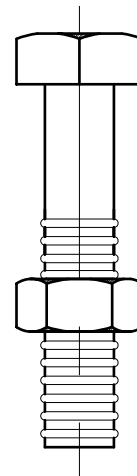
HEX HEAD BOLT WITH HEAVY DUTY NUT
